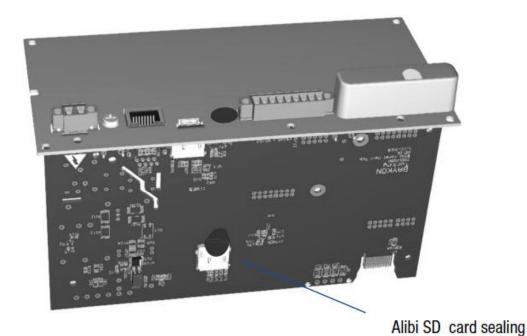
Sealing of BX30 Fill indicator with brittle sticker.
